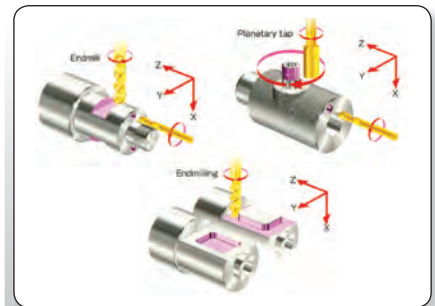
Technological operations at the CNC lathe-type machining centre [Miyano]
